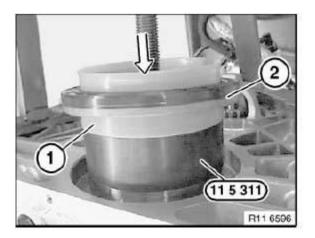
Pushing Radial Shaft Seal Over Support Ring Onto Special Tool 11 5 311 Courtesy of BMW OF NORTH AMERICA, INC.
